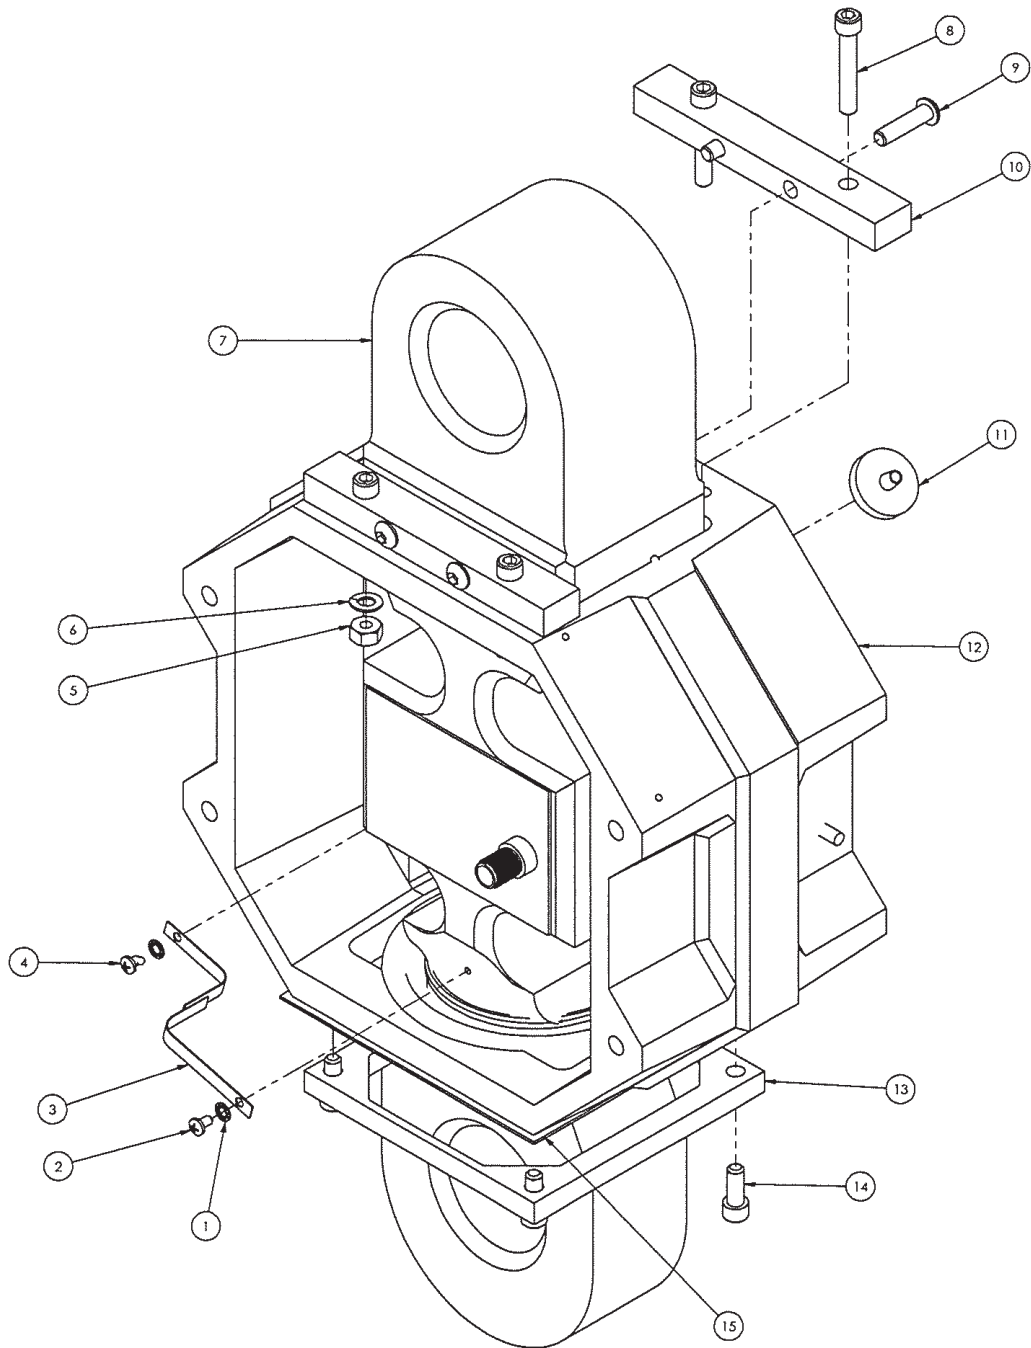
MSI-6360 Mid-Section Assembly 50,000 and 70,000 lb
